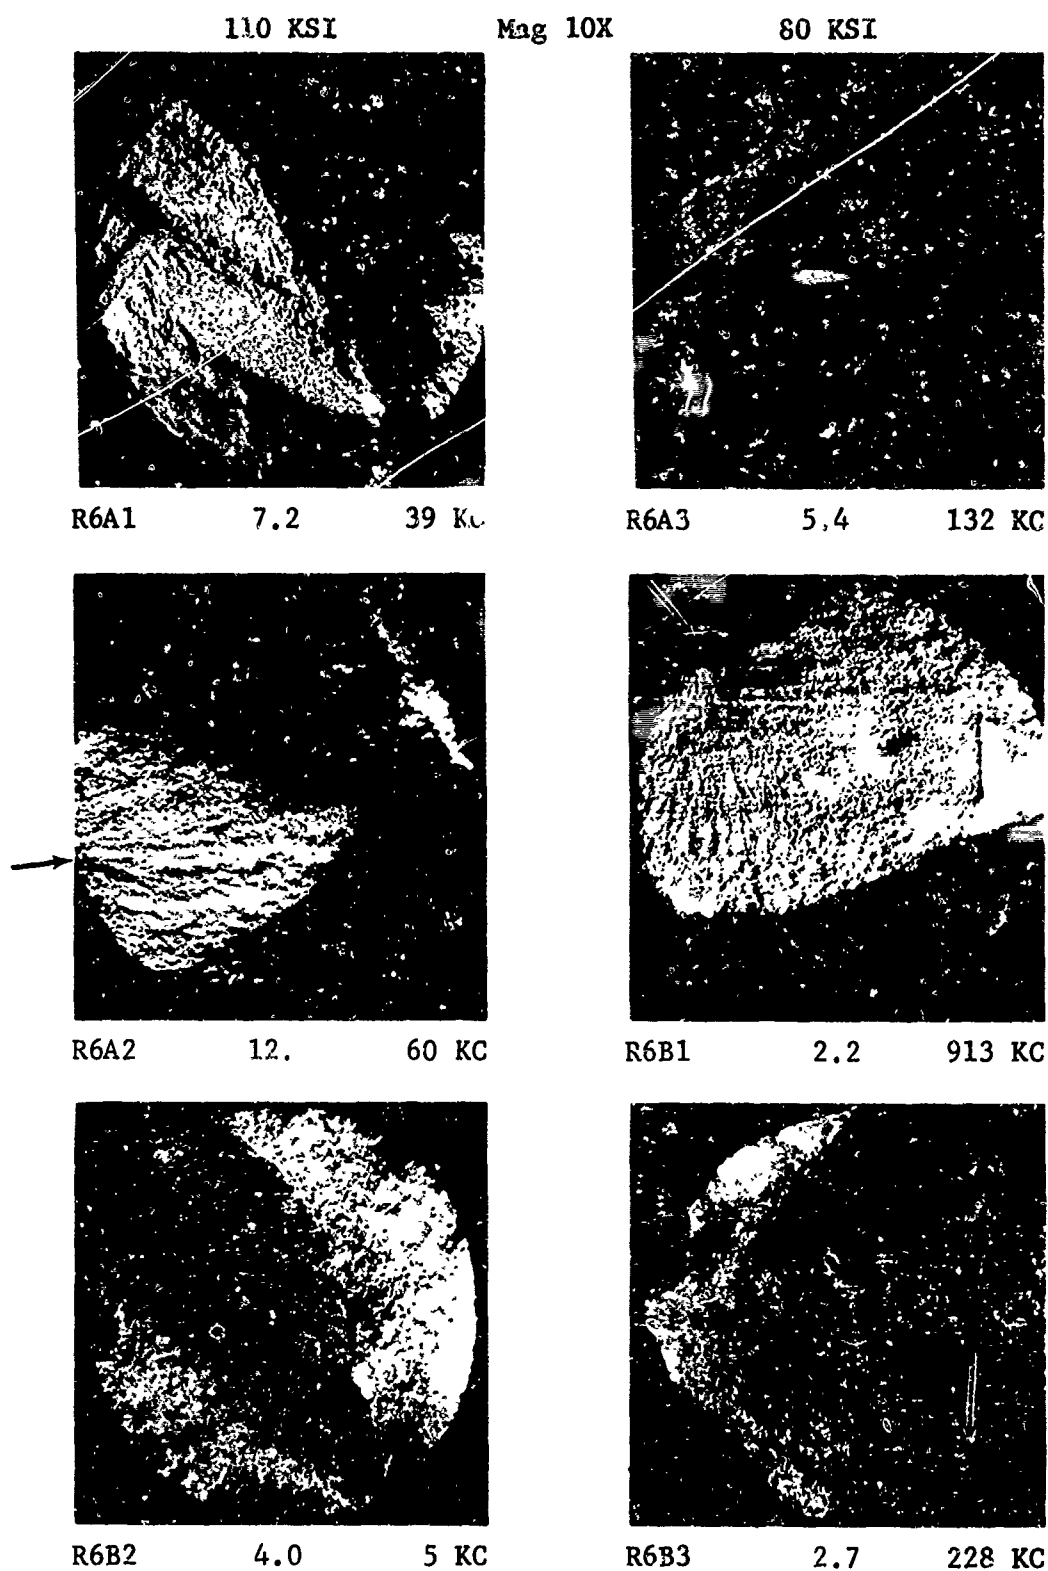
Fracture Surfaces of Failed Fatigue Specimens Series R6-
